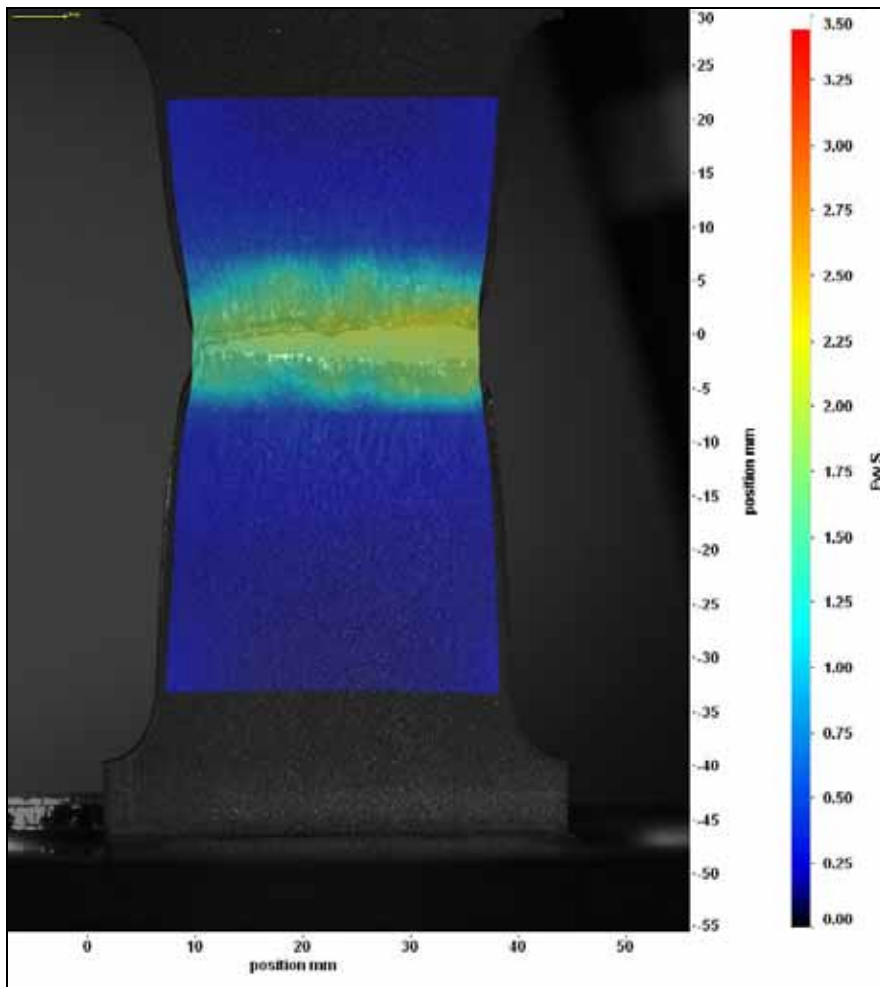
Strain map of an EB weld which fractured at the centre of the weld. Lid material is on the top and tube material on the bottom. Deformation localizes to the middle of the weld with large grain size. It can also be seen that the extruded tube material is elongated much more than the forged lid material.
